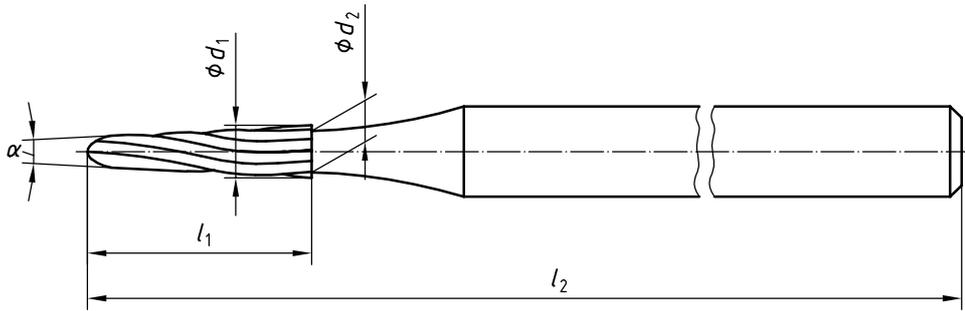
Torpedo, cylindrical, head length 10 mm, carbide finishing burs
